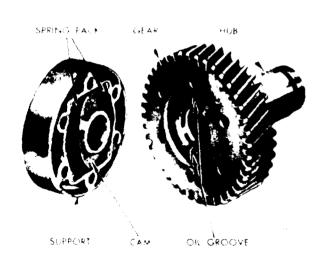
B-175. Relation of Blower Drive Cam to Oil Grooves in Gear Hub
